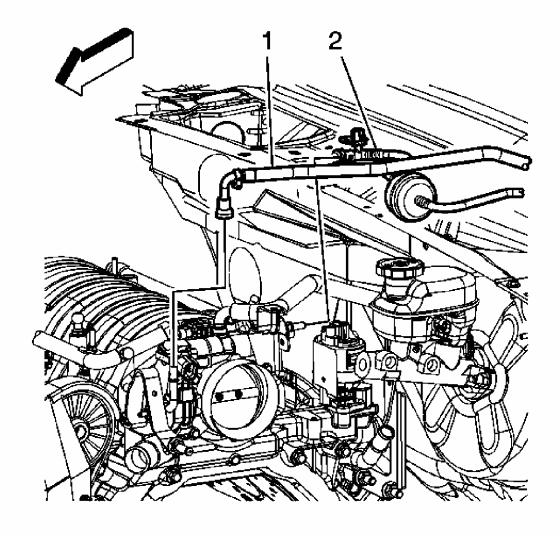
Identifying Fuel Feed Pipe & EVAP Line Quick Connect Fitting Courtesy of GENERAL MOTORS CORP.
